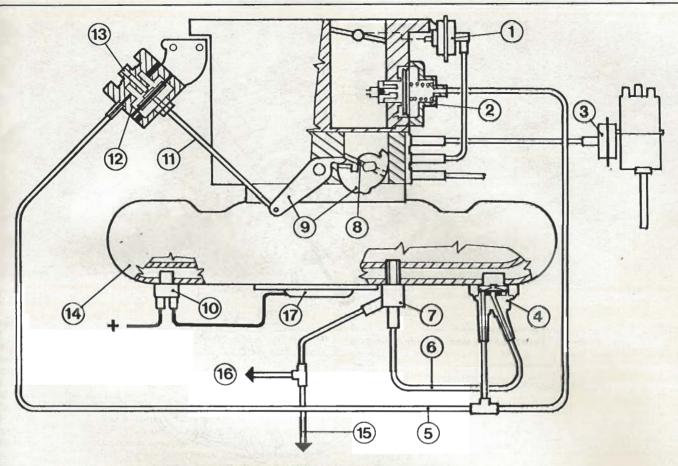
Carburettor ancillary devices (Sec 15)
